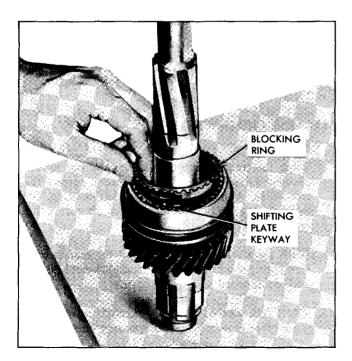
D-28 Installing 1st Speed Synchronizer Blocker Ring
